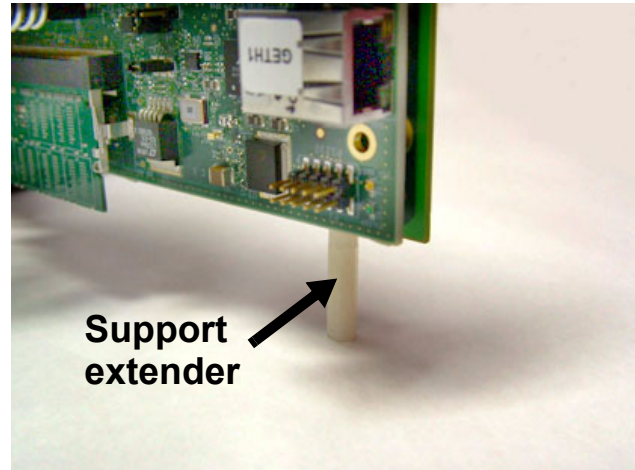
Support extender fastened to PCI\_PClc adaptor
